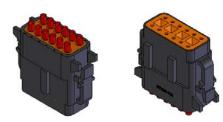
Remove plugs and wedge lock as shown. Wedge lock is replaced once wires are positioned properly.
